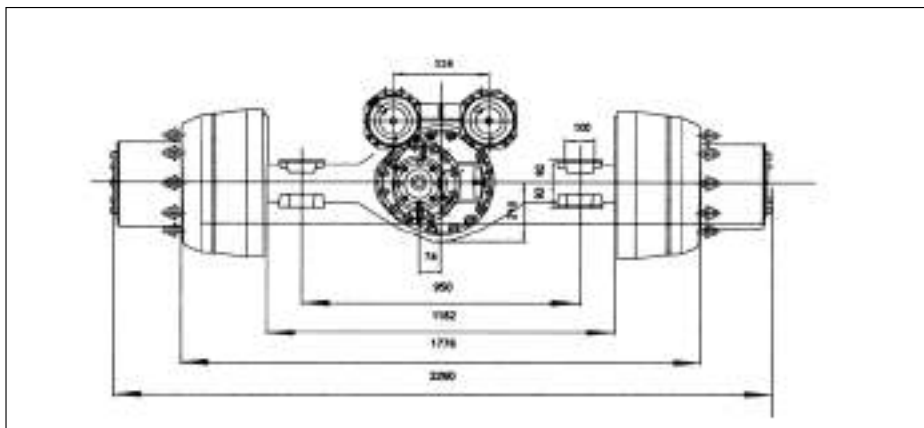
Basic dimensions of STEYR drive rear axle
